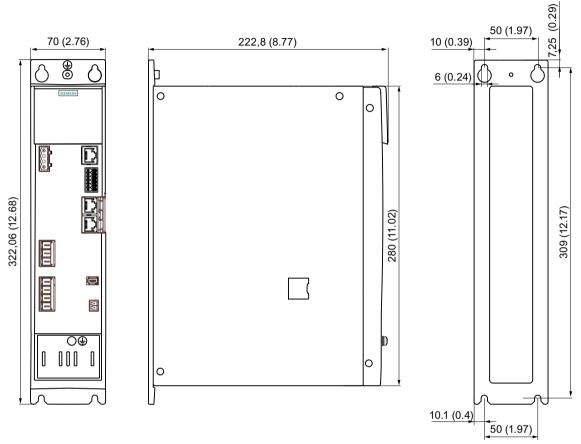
Dimension drawing SINAMICS S210 FSB, 3 AC, dimensions in mm (inch)
